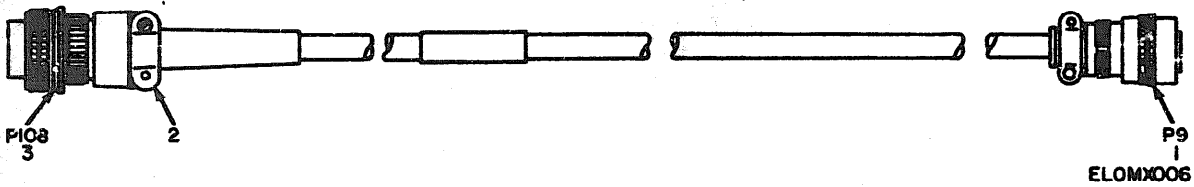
Cable Assembly, Special Purpose, Electrical, CX-7516/ASM-63 998940-01-01 (W3).
